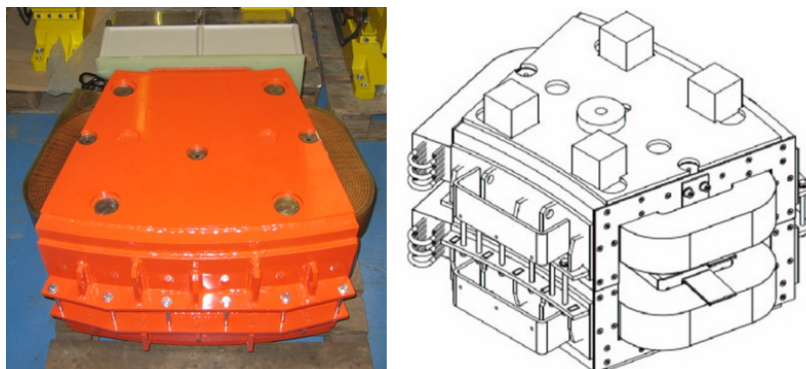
Matching steering magnet: (a) pre-assembled yoke of the matching steering magnet, (b) yoke and coils during assembly preparation.
